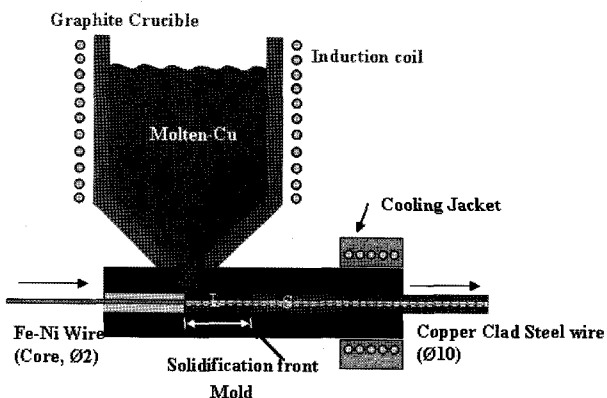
Schematic illustration showing continuous casting equipment for copper clad steel wire.
